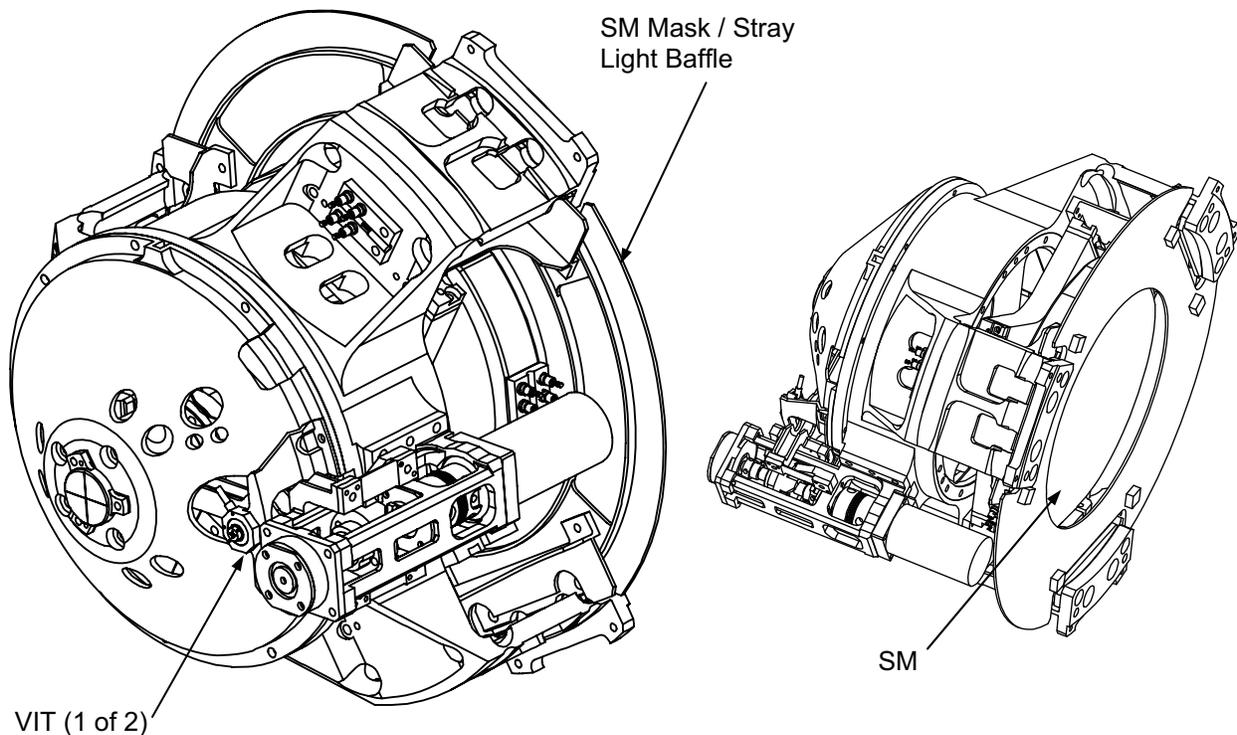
Focus Mechanism Engineering Model (FM-EM)
